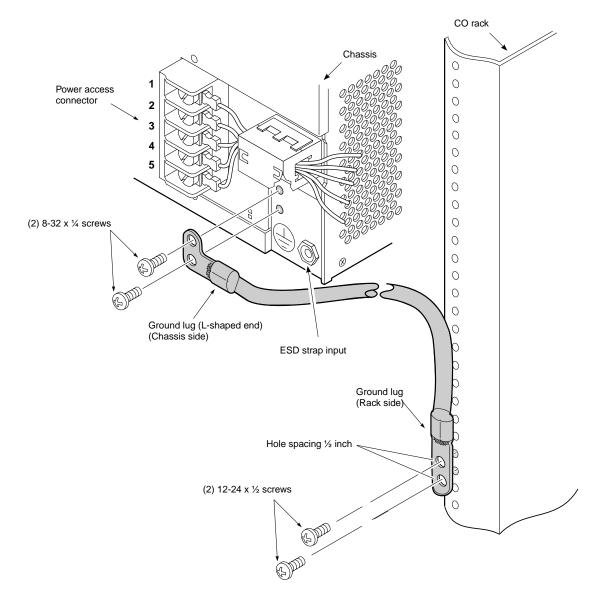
Grounding the Chassis (Right-Hand Side, Rear View)
